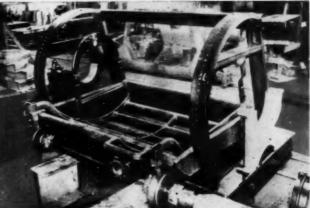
Swenson salt-type filter drum during construction showing large passages and open grid for drainage
